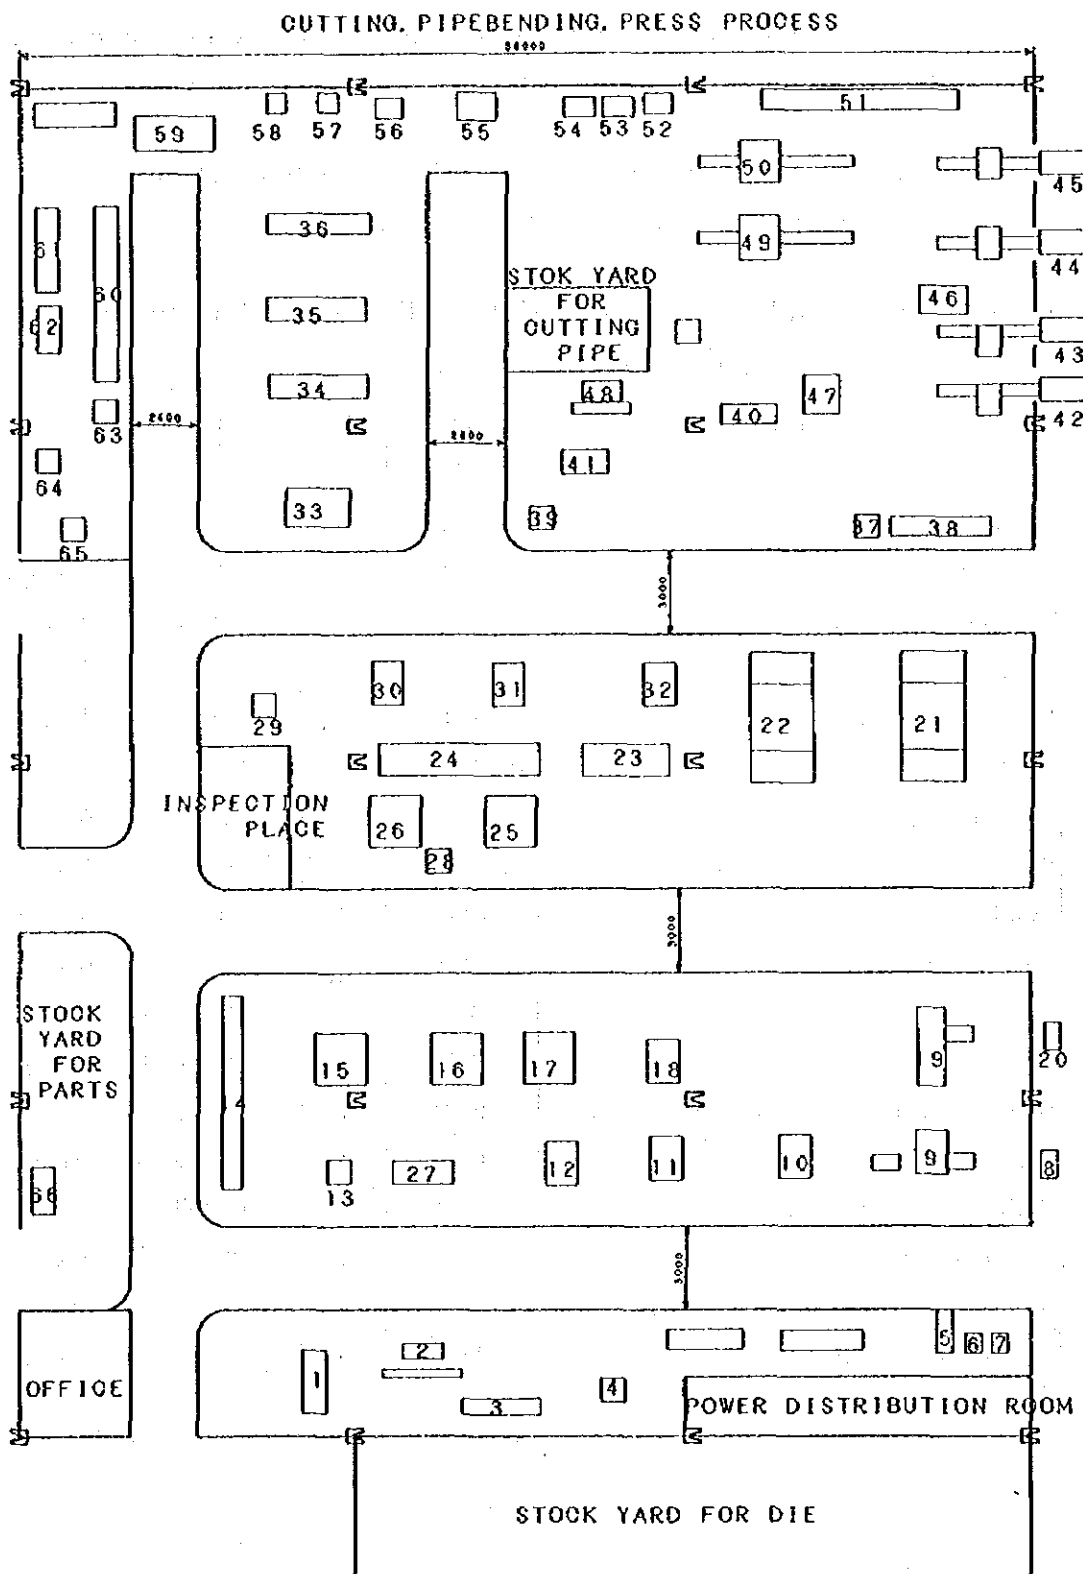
Equipment Layout of the Cutting, Press Working, and Pipe Bending Processes
